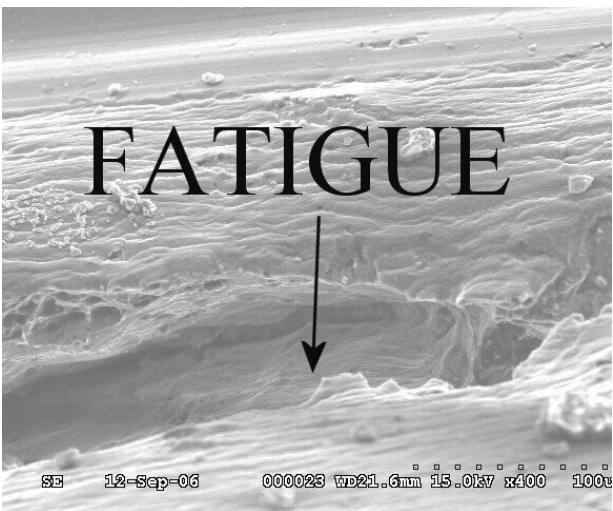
400X Fatigue Crack in Thread Root
